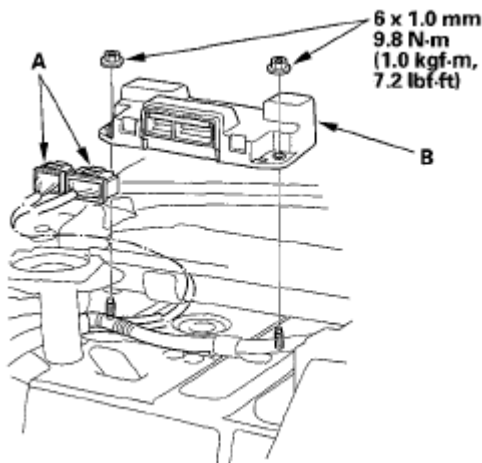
Identifying TPMS Control Unit With Torque Specifications
